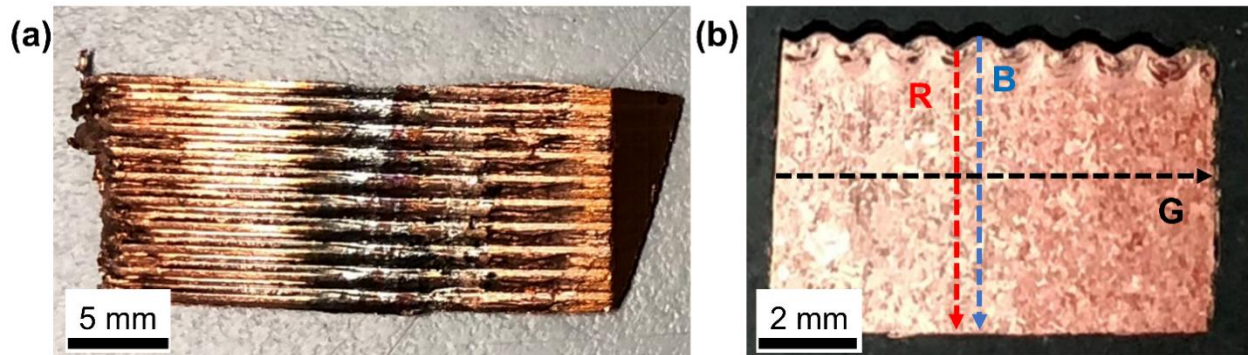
(a) View normal to the welding surface of the weld wheel, showing the dark band (DB) that represents the degradation of the weld wheel surface, (b) View parallel to the axis of the weld wheel, resulting in a cross-sectional view of the dark-band (CS). Series of indents were made along lines B, R and G.
